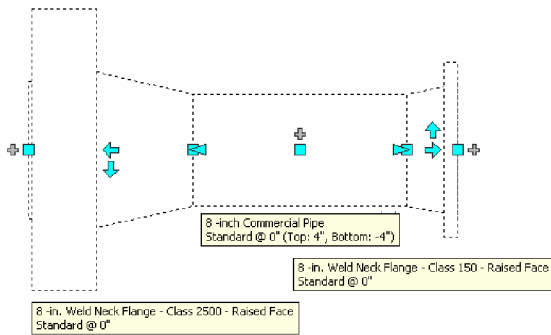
is an extreme example of a piece of pipe with a Class 150 Weld Neck Flange on one side and a Class 2500 Weld Neck Flange on the other. Both flanges were made to fit on the same pipe object.
